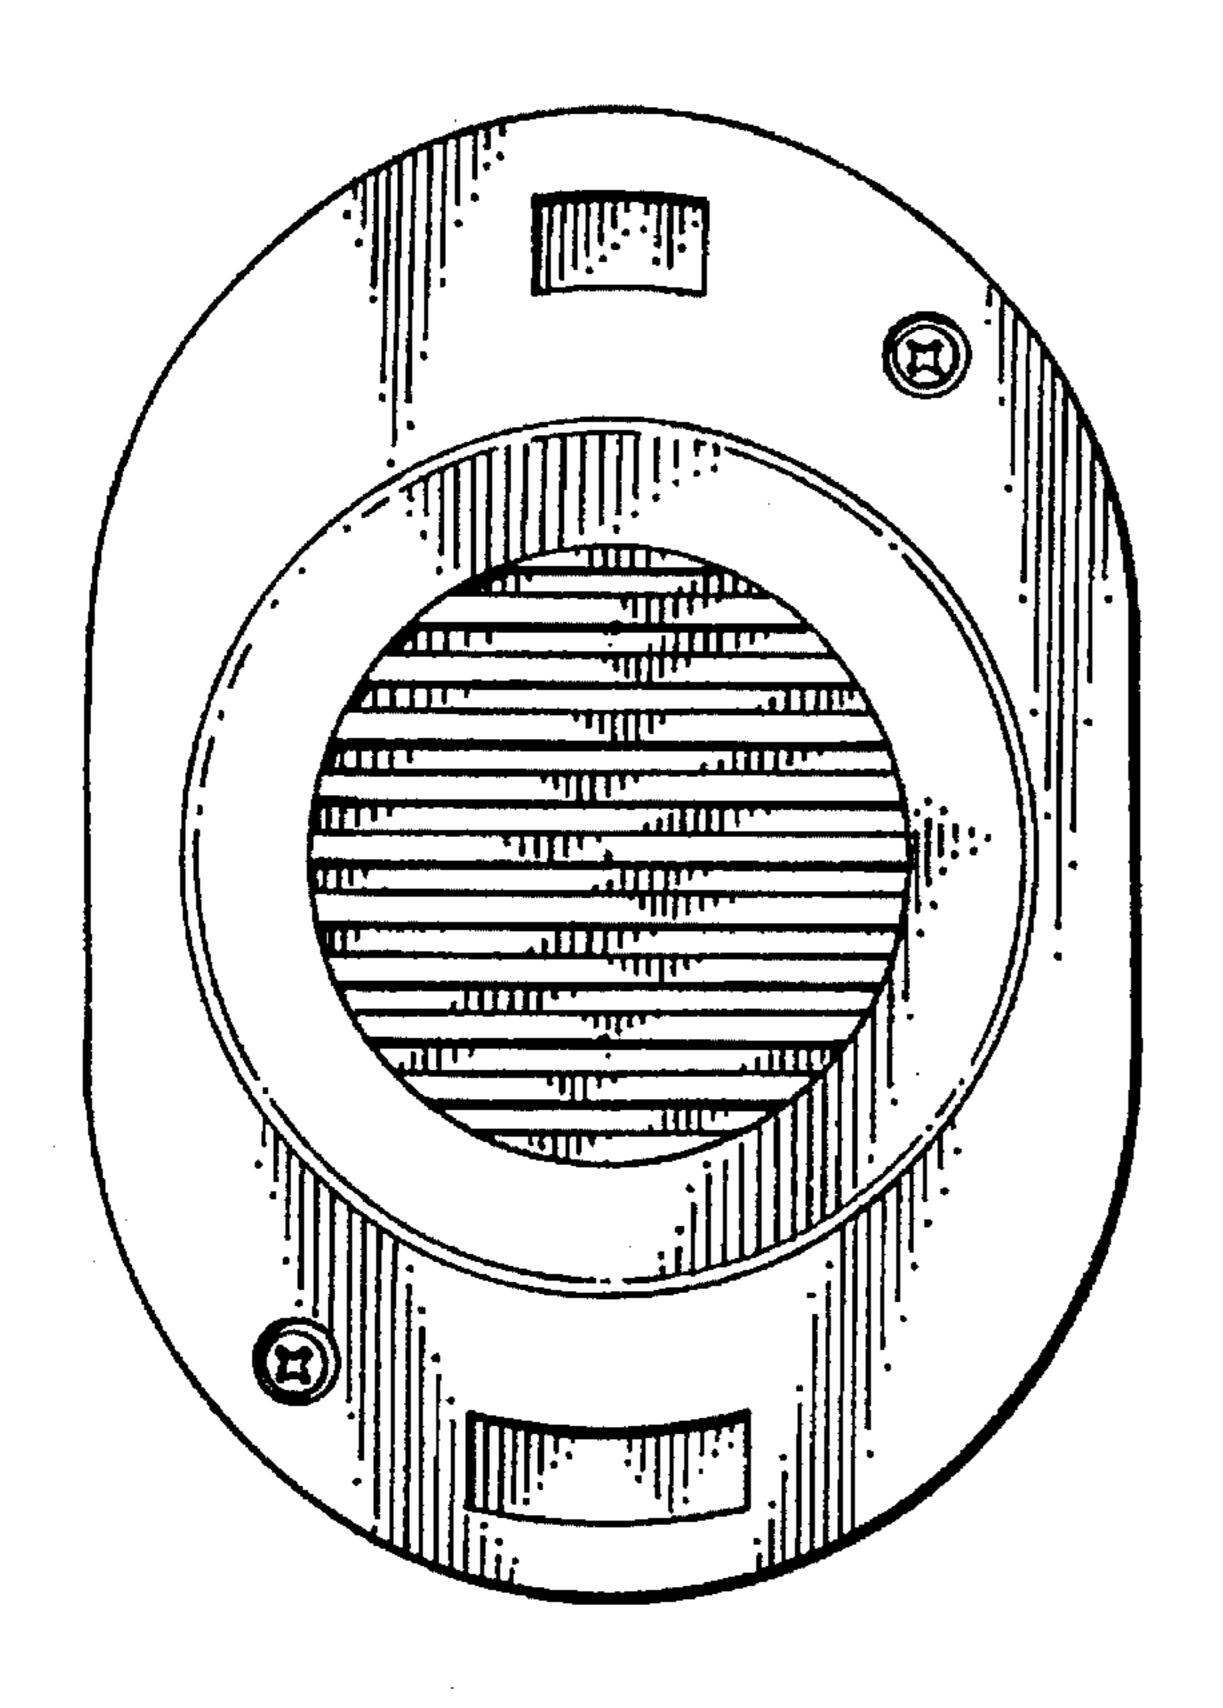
is a bottom view of the headphone shell of FIG. 1.
